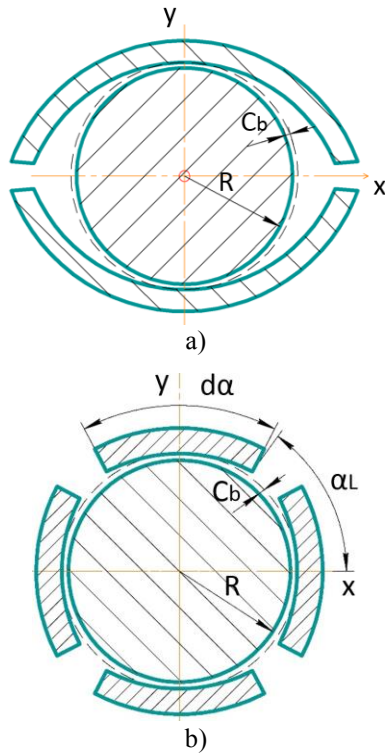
Bearing Schemes: (a) Elliptical; (b) 4-lobe Fixed Pad
